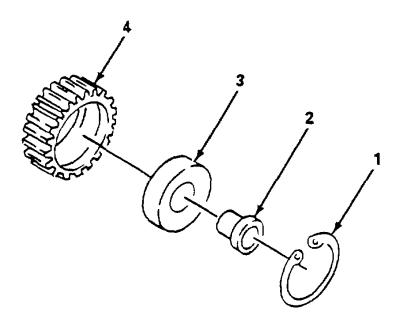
Tension Pulley Assembly, Driving Gear and Eccentric Shaft Drive Gear, Repair.
